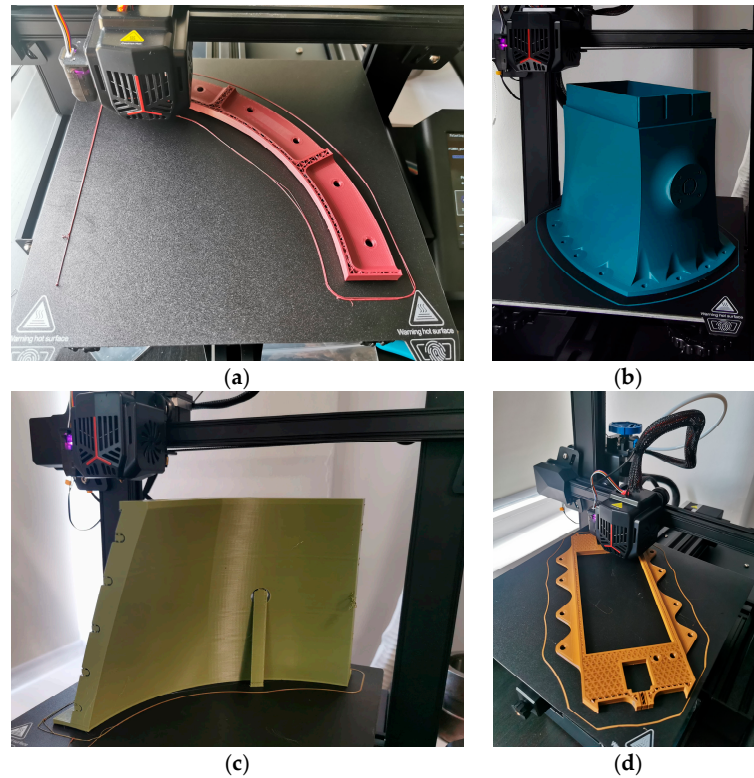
Three-dimensional (3D) printed components: (a) quarter of the air hose coupling component; (b) final test section; (c) 1/4 of the first section; (d) adaptor part for load cells.
